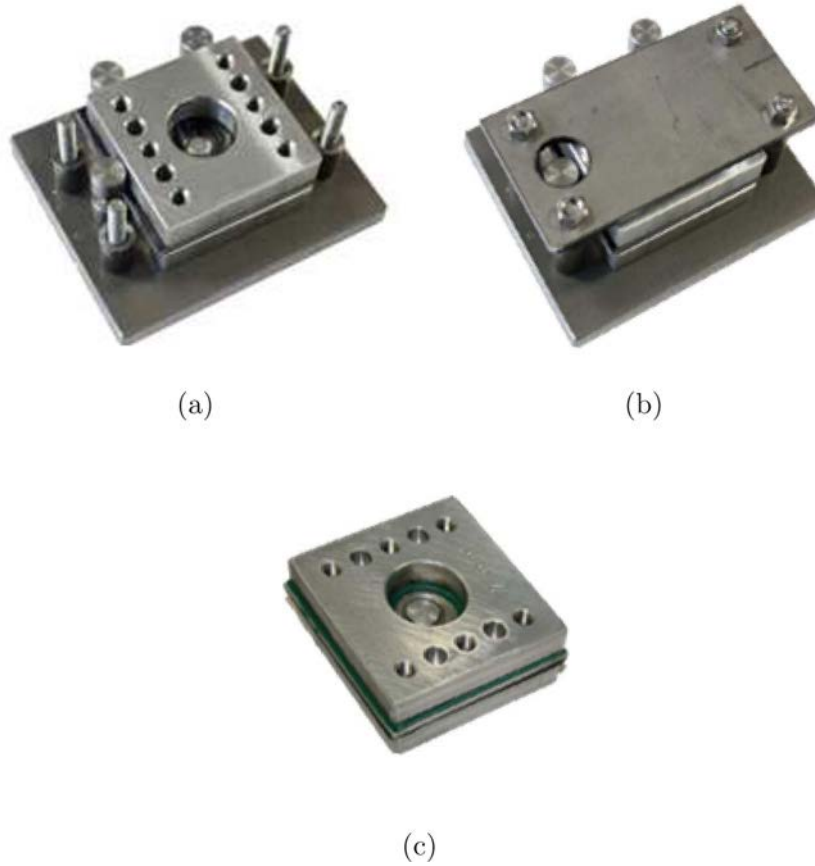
Fixture system of the SPR specimens during the adhesive curing.
